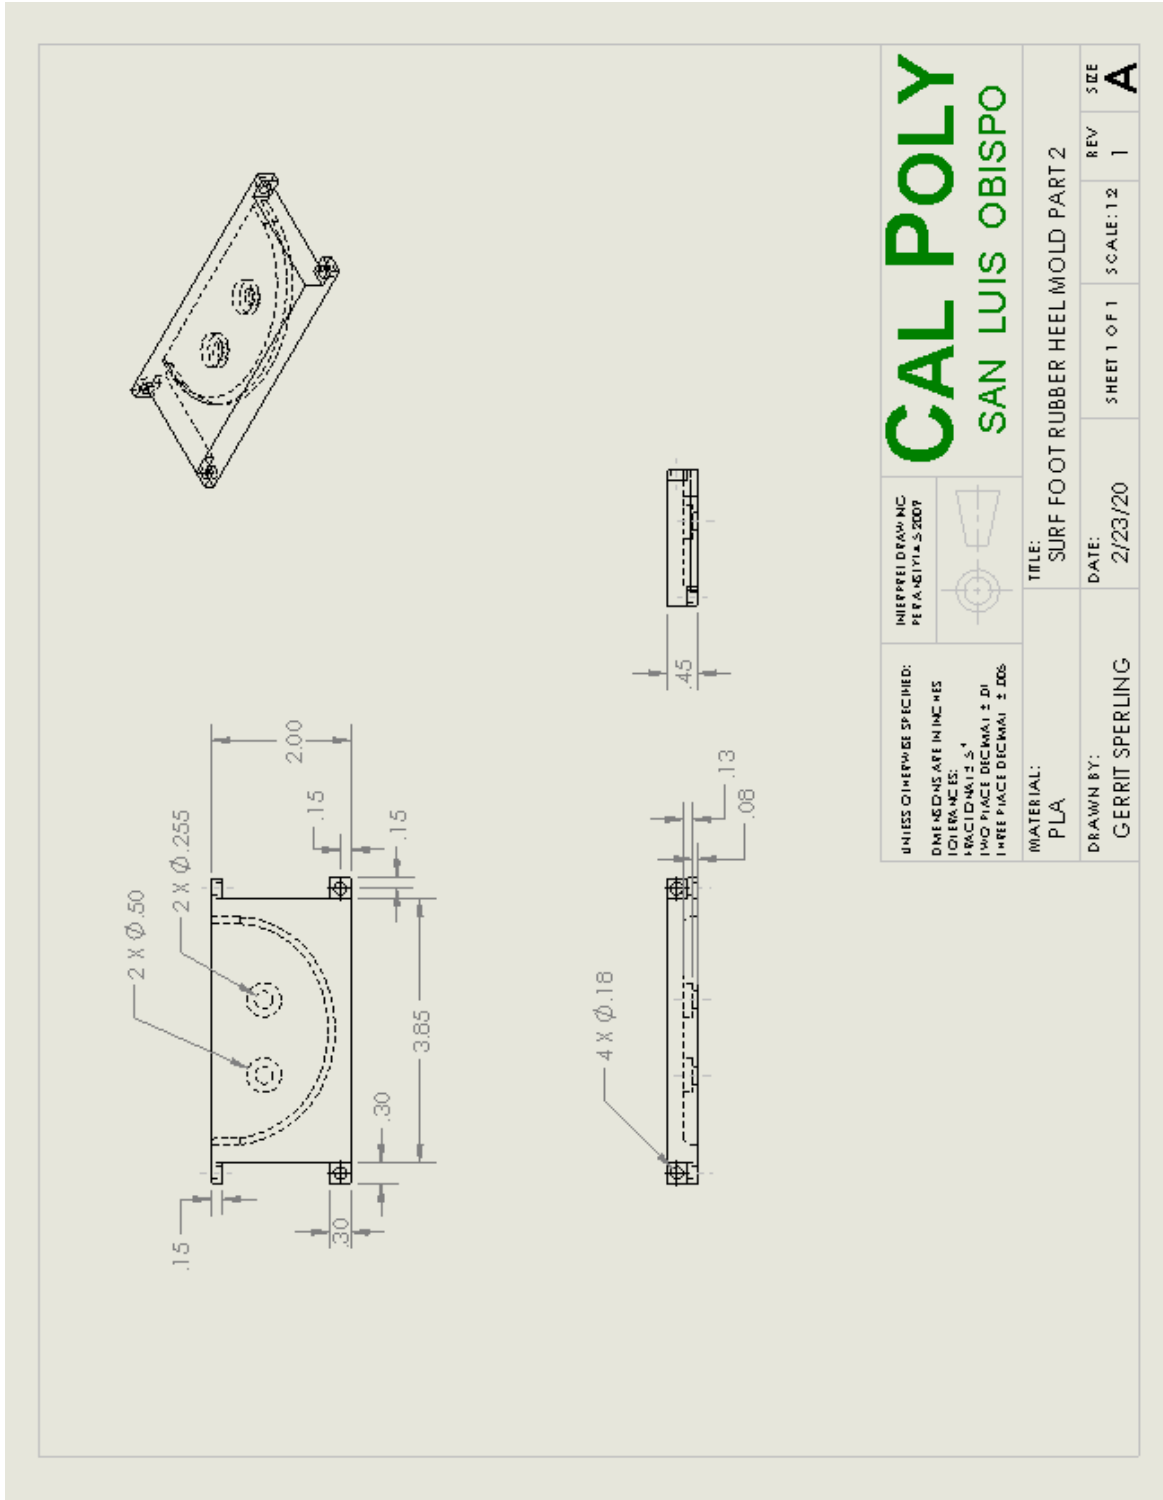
Detailed Drawing of Top Outer Mold for Rubber Heel
